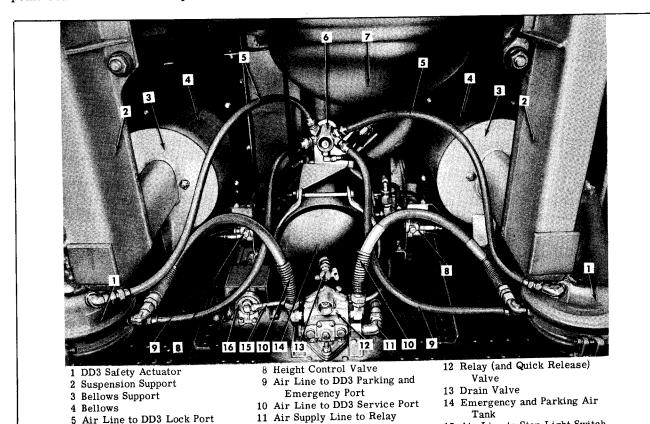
DD3 Brake Actuator System at Rear Axle—Installed
